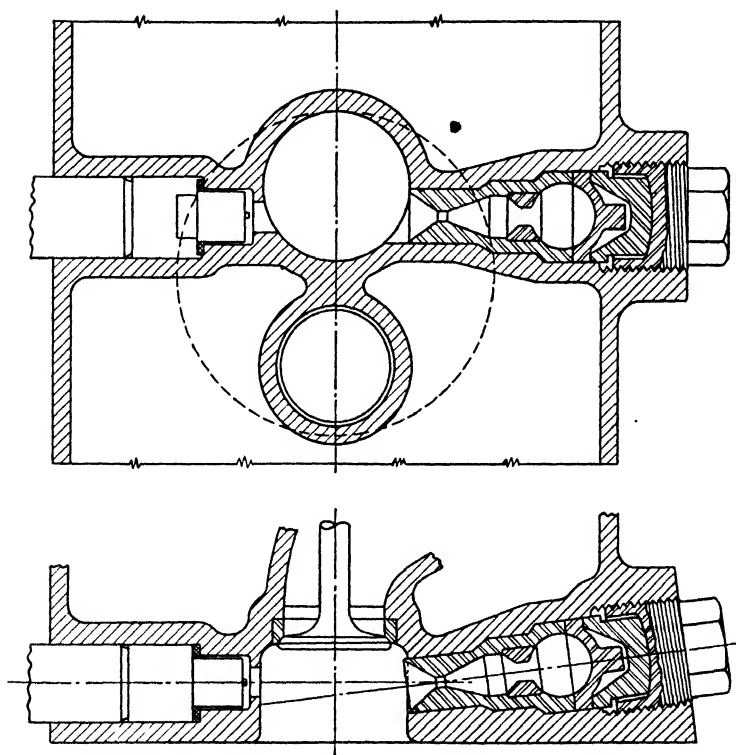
LANOVA SINGLE-LOBE COMBUSTION HEAD.
